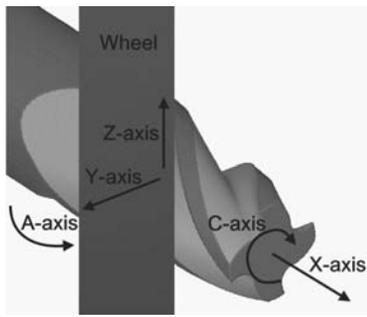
Diagram of grinding a tapered helical flute of end mills
